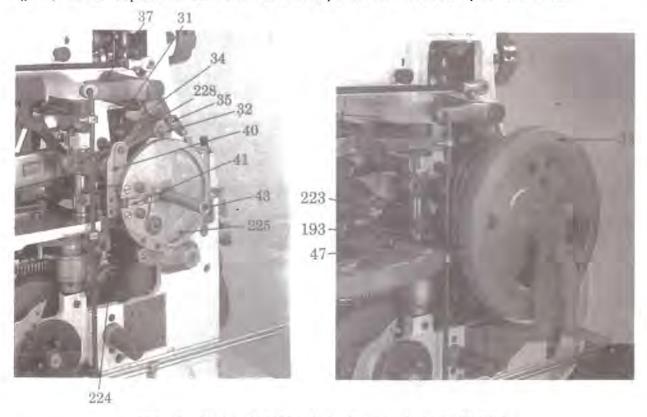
View of Buttonhole Cutter Pulley Showing Buttonhole Cutter Engaging Stud and Latch
